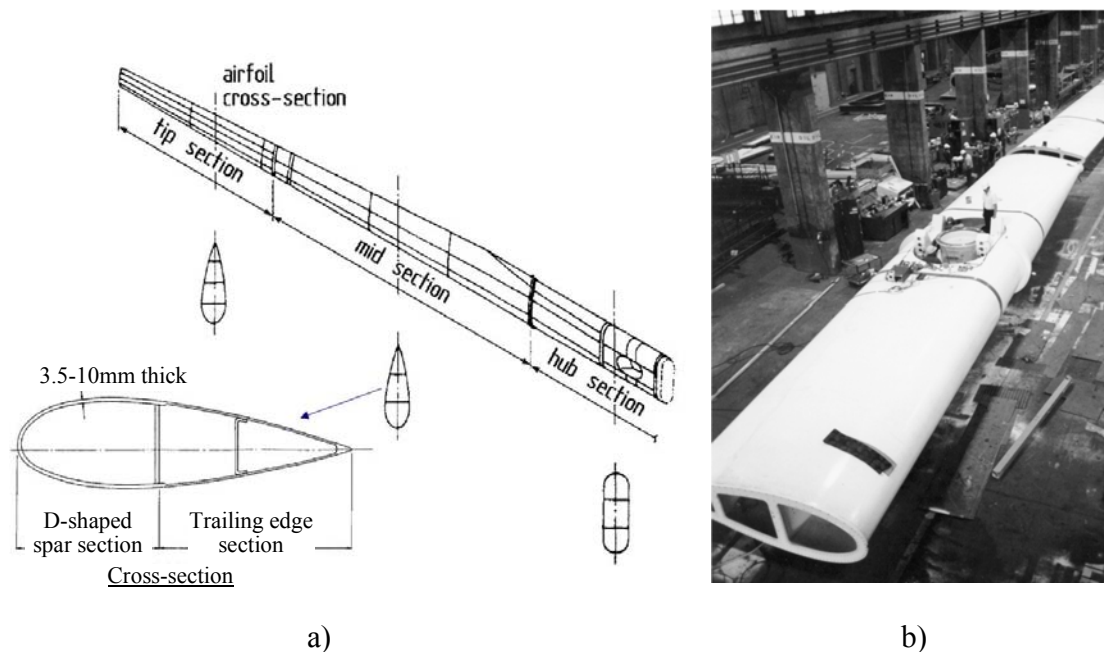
Boeing’s MOD-2 steel blade [9,16]. a) blade configuration and cross-section, b) blade hub section showing connecting flange to mid-section.
